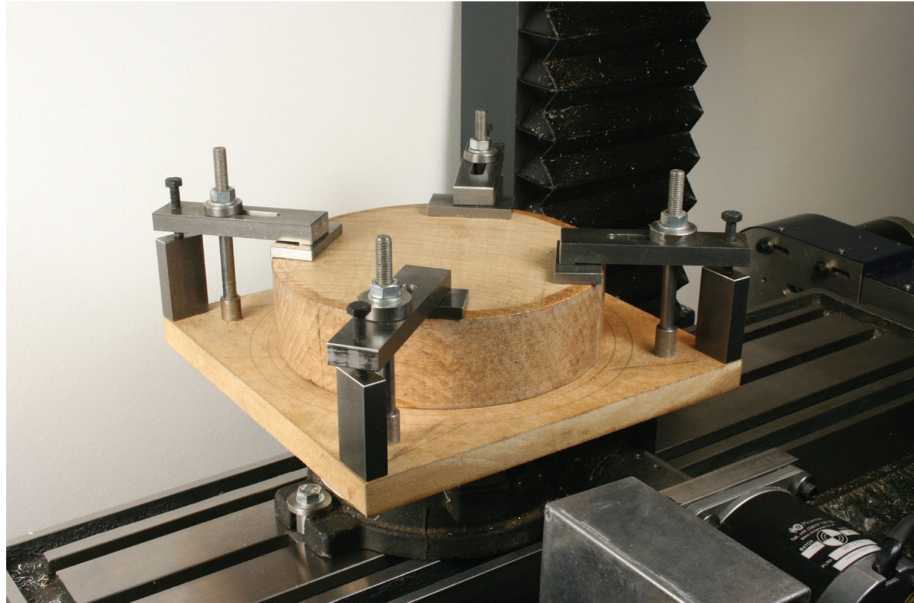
Mounting this clock base on a fixture on a rotary table (fourth axis) allows a small mill to machine positions it could not otherwise reach.
